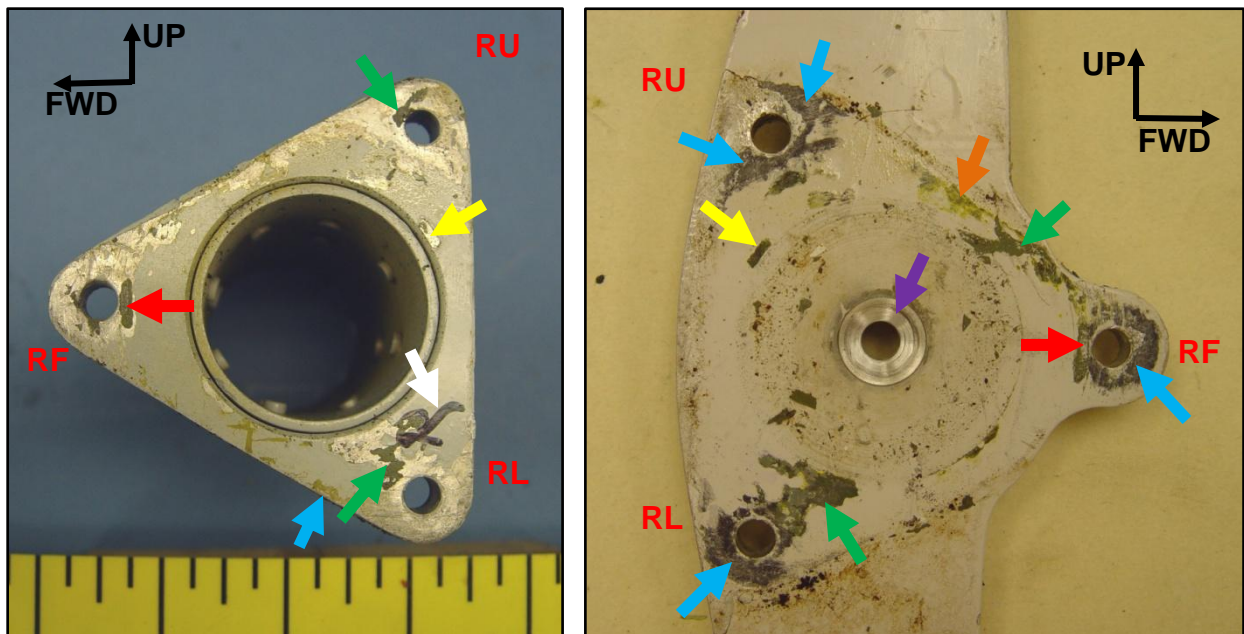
The mounting face of the right fitting (left) and it's mating face on the right horn (right).
